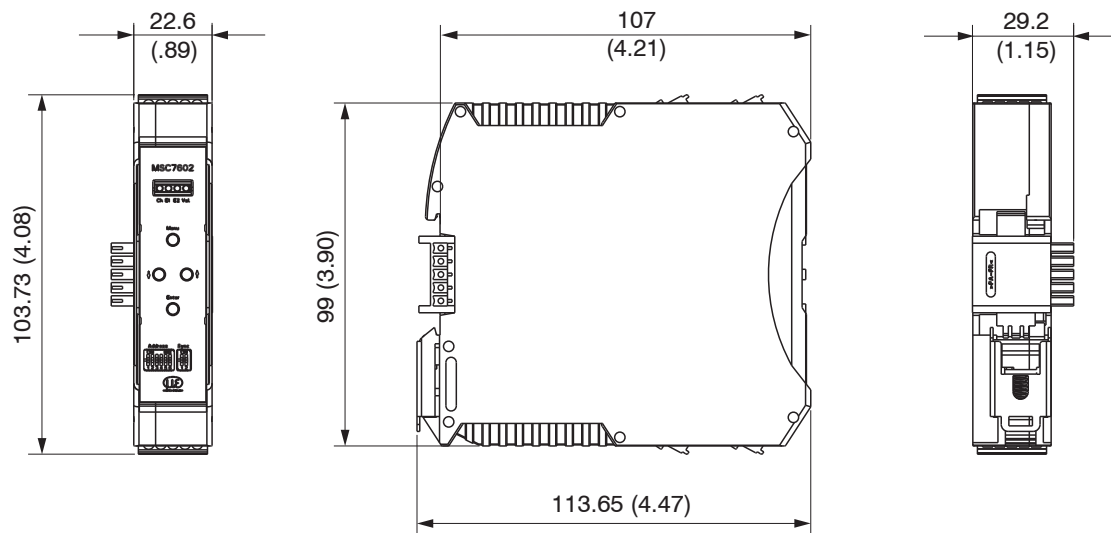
Dimensions of MSC7602 controller model, dimensions in mm (inches, rounded off)
